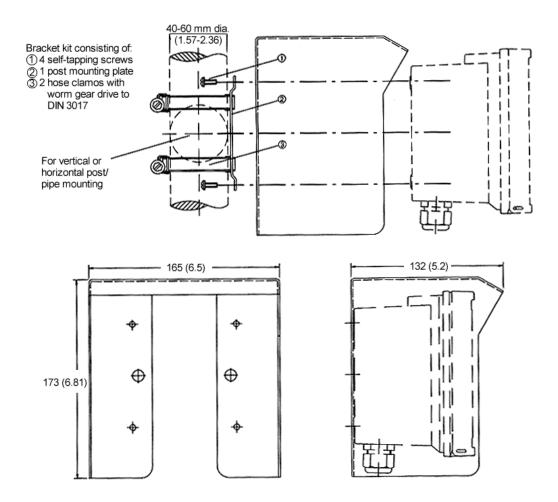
Dimension Drawing for APT2000 with Wall or Pipe Mounting
